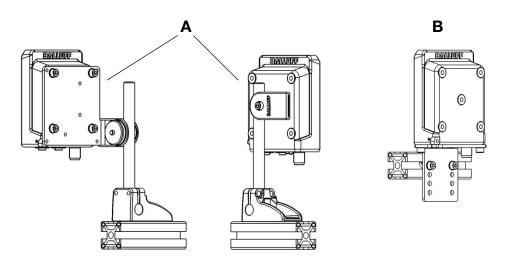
Mounting examples (A: Using Balluff Mounting System, B: Using mounting bracket on T-slot profile)
